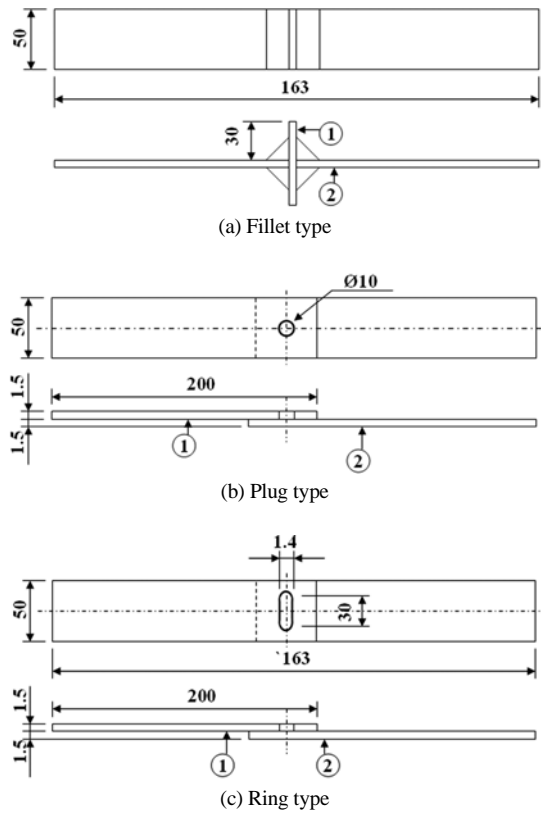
Typical gas welded joint types in the rail road car body
